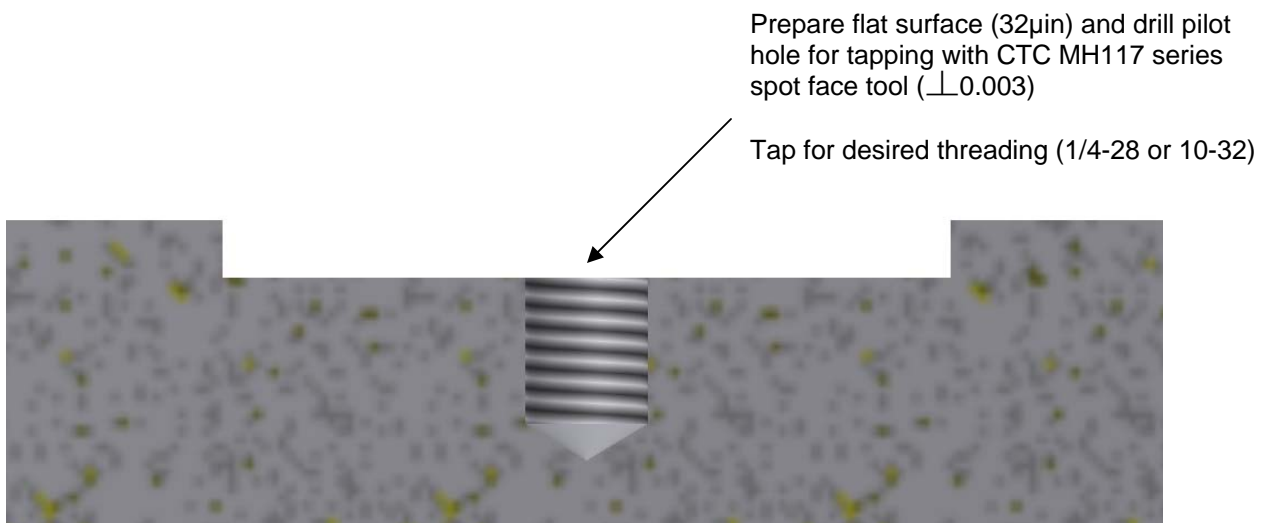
MH107-1B or Stud Mounting Accelerometer directly to machine surface
